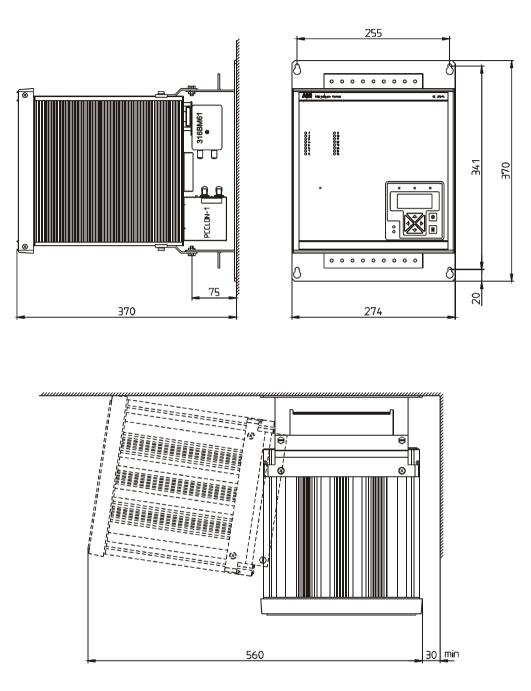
Surface mounting, casing able to swing to the left, rear connections. Size N2 casing
